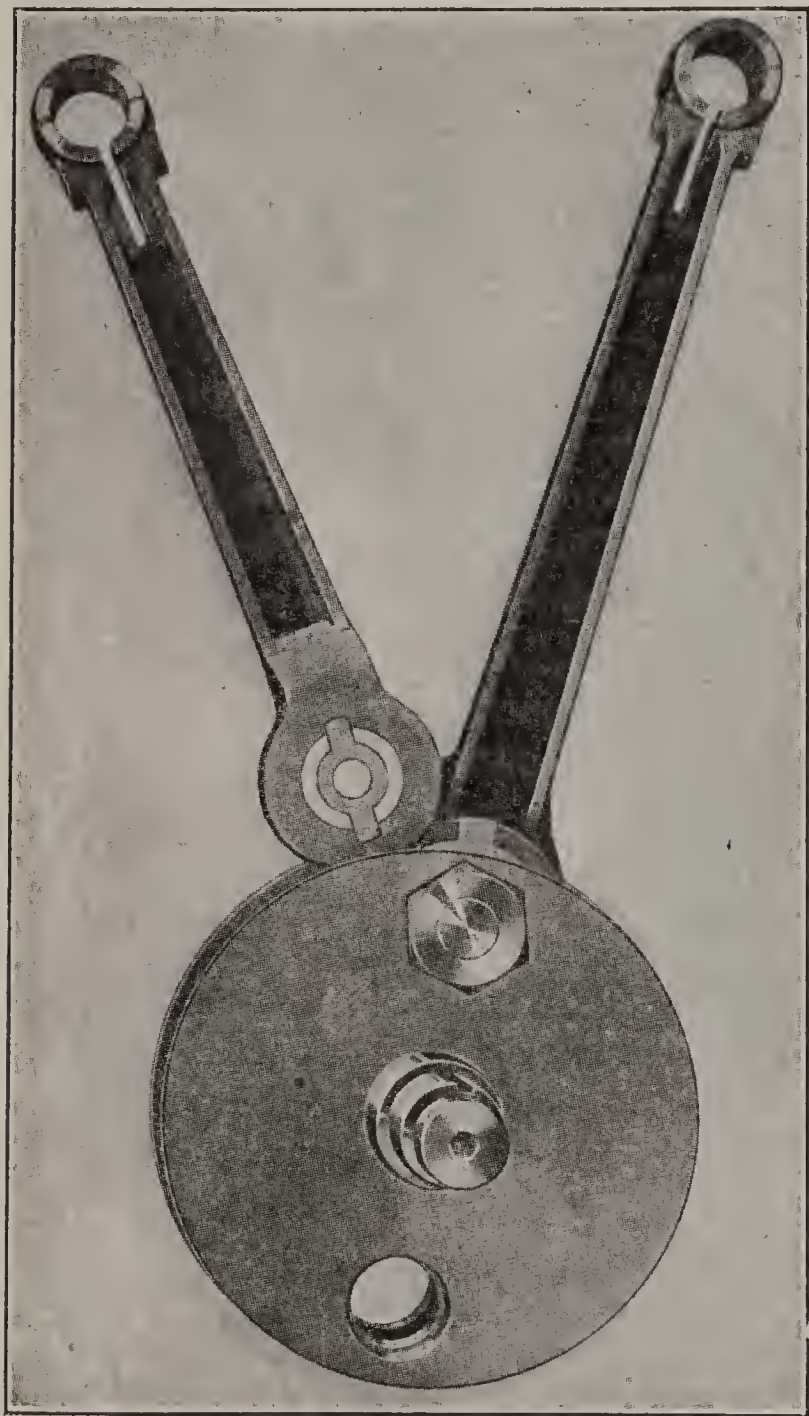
Connecting Rod and Crankshaft Assembly of the De Luxe Twin Cylinder Motor.
